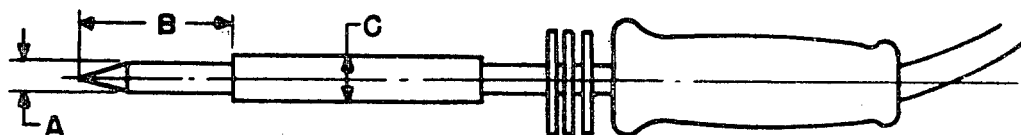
Type I, cord assembly 1 and 2 soldering irons, standard plug tip, two- and three-conductor, power cord and plug connector.
